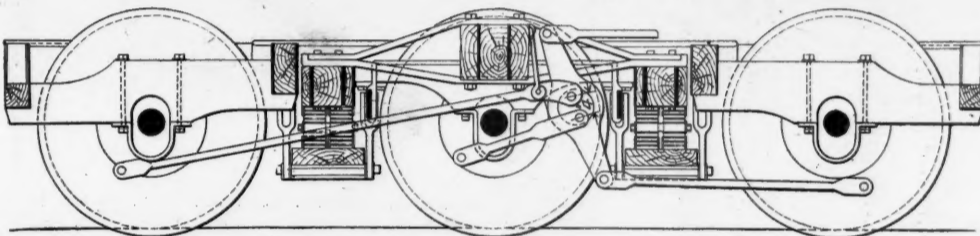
New York Air-Brake Co.'s Method of Equalizing Brakes on 6-Wheel Truck.
